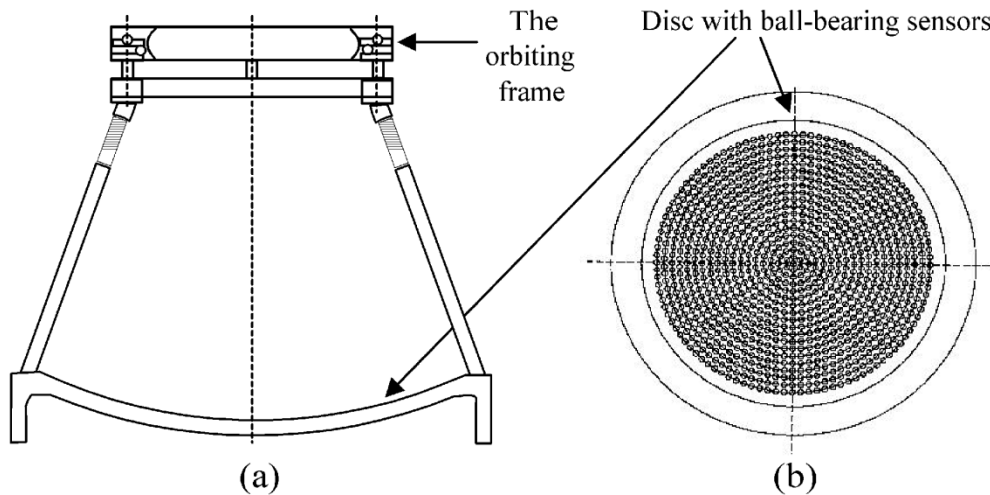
Omnidirectional ball-bearing disc locomotion device: (a) side view; (b) surface of the OBDP.
